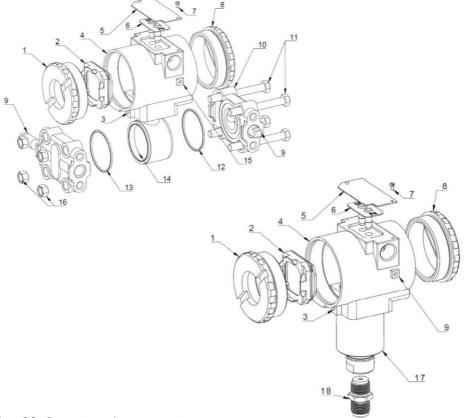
Pressure transmitter components: a) AMZ 5050; b) AMZ 5450
